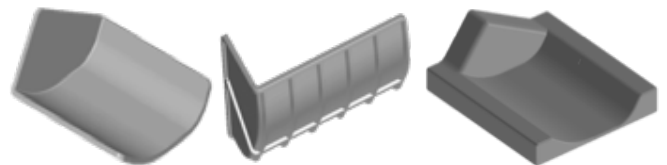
Proposed speaker box lay-up mold designs. Shell style (left and middle). Sparse style (right).
